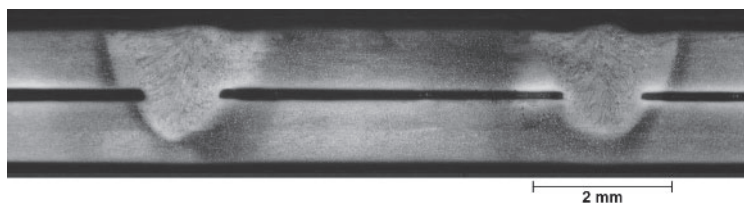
Laser spot welded TRIP800 steel sheets of 1.0 mm thickness (Reproduced courtesy: GKSS, M. Kocak)
